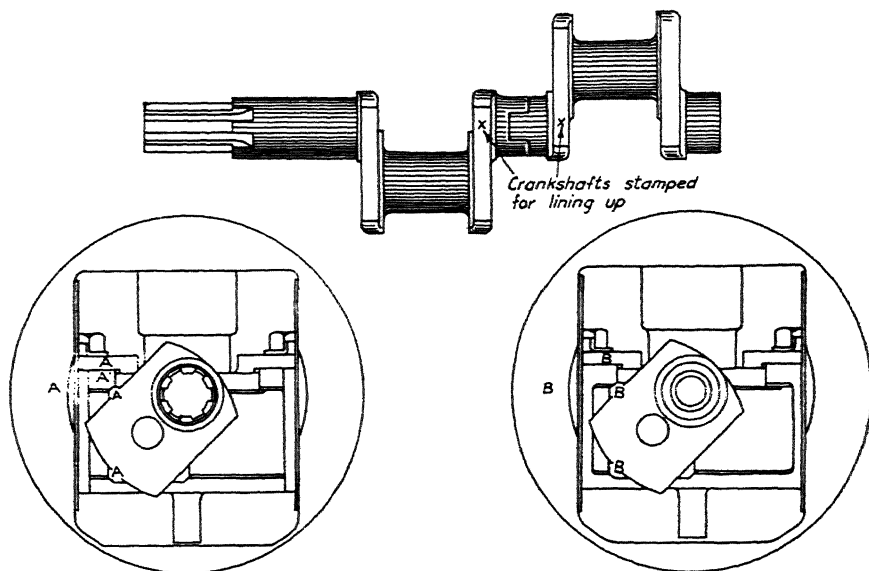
IDENTIFICATION MARKINGS TO AID IN REASSEMBLY OF TYPE AW COMPRESSOR
